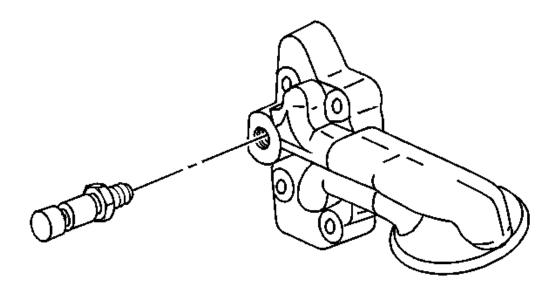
Identifying Oil Filter Adapter & Pressure Relief Valve Courtesy of GENERAL MOTORS CORP.
